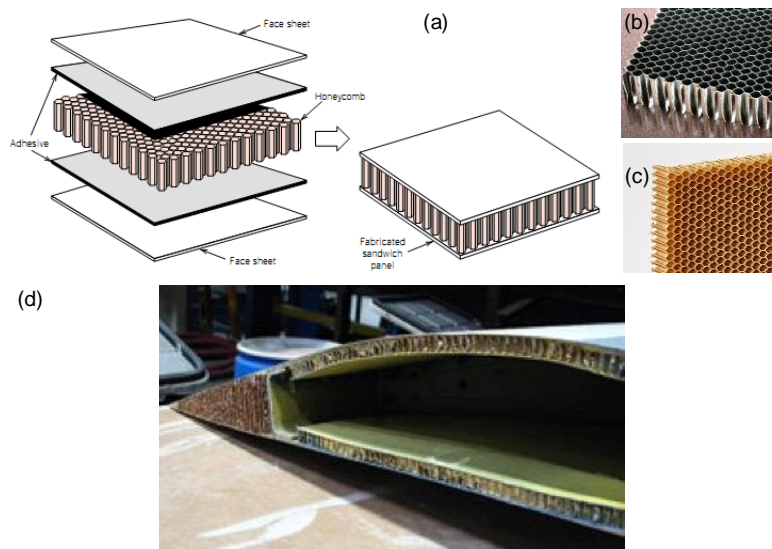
Sandwich composites: face-sheet and honeycomb stacking [11] (a), rendering a sandwich panel (b). Honeycomb core: (c) aluminium honeycomb; (d) Nomex® polymer honeycomb. (e) Example of sandwich panel application in the Boeing 747 fore flap.
